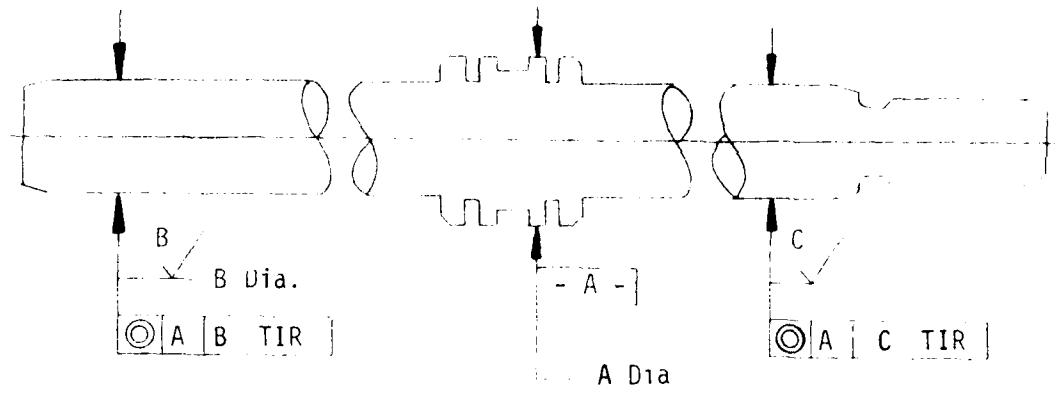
A ROD CRITICAL DIMENSIONS
